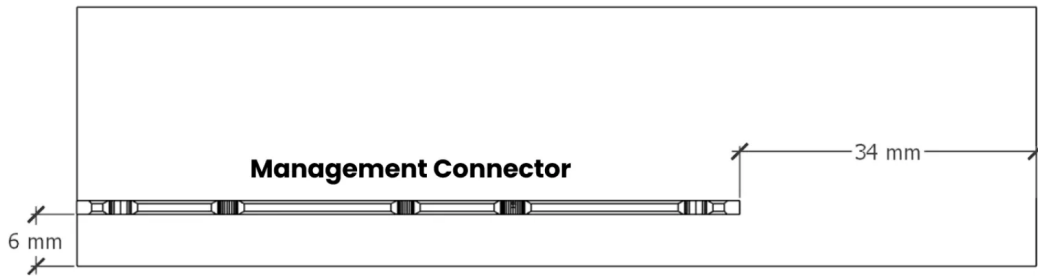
Management Connector Plug Layout (Front View)
